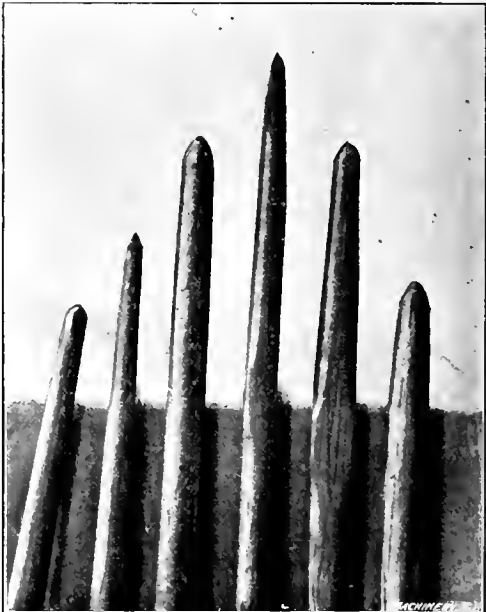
Wooden Tools which are used on Large Thin Copper Blanks
